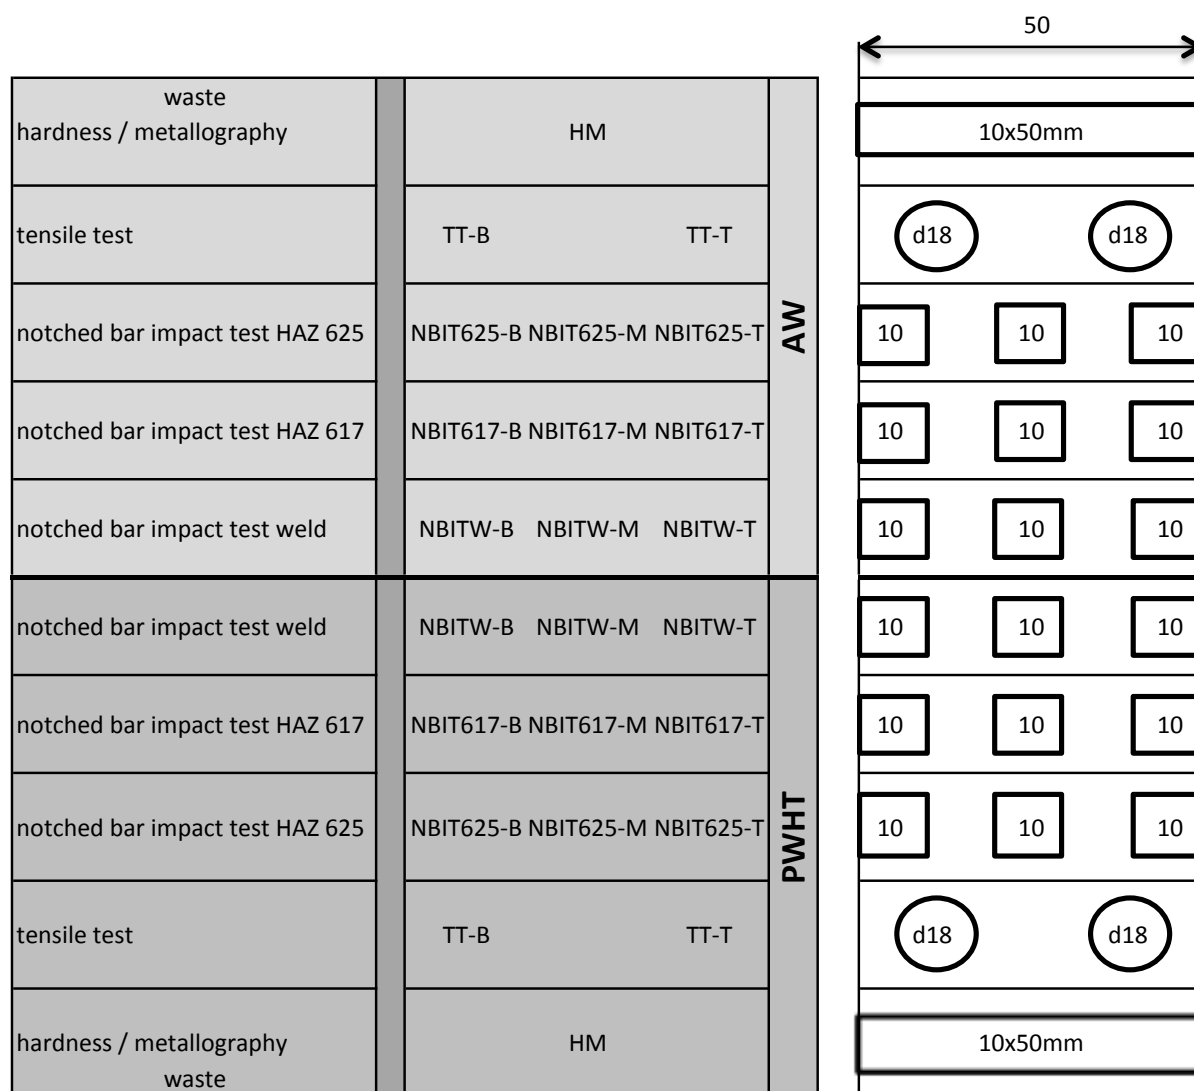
SPECIMEN LAYOUT TIG/SMAW WELD
